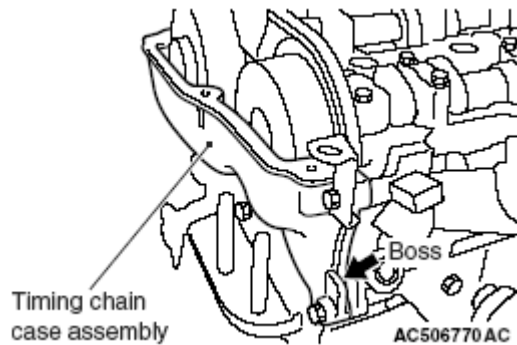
Identifying Timing Chain Case Assembly And Boss
